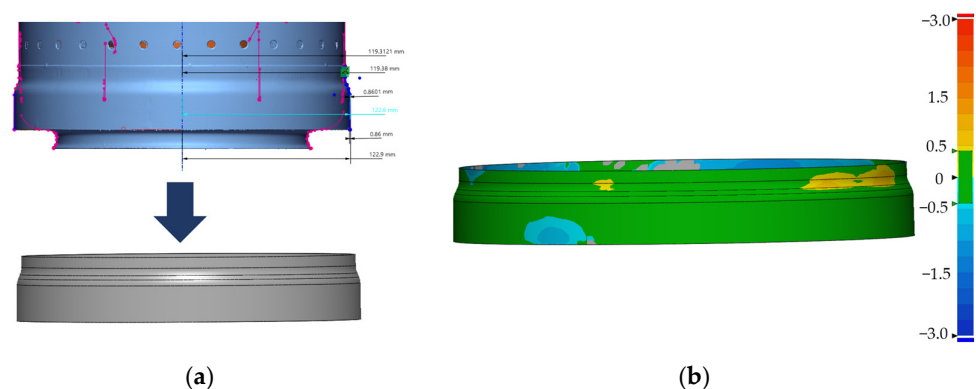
Receipt and inspection of solid parts of the combustion chamber housing of the Capstone micro-GTU C 65 in the Geomagic program Design X: (a) creating solid geometry from a polygonal mesh; (b) checking deviations of the solid part from the polygonal model using the Body Deviation function.
